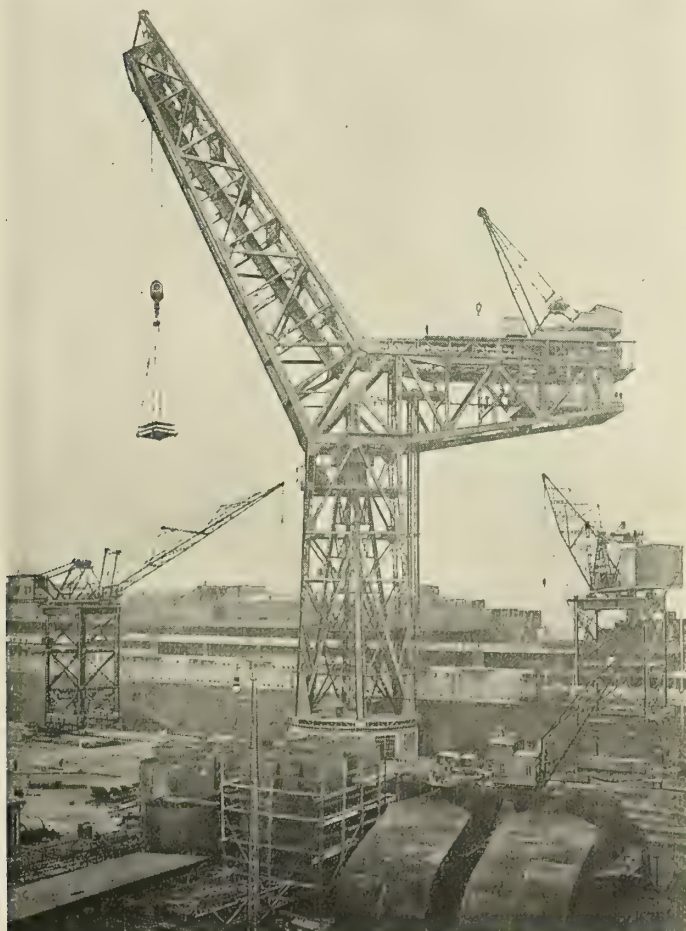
250-Ton Hammerhead Crane With Raised Jib
